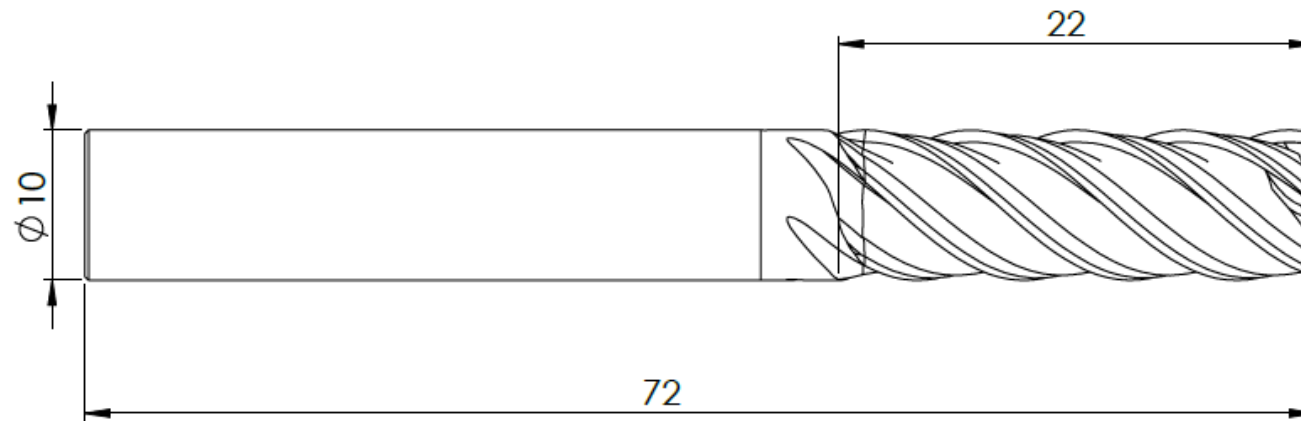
End-mill design for experiments on Inconel 718, 5-flute
